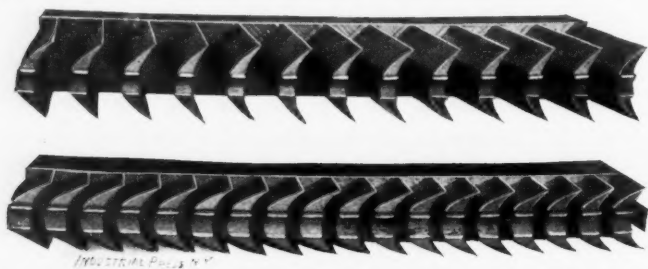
Bucket Segments: The lower one for High-pressure Steam and the upper one for the Steam after it has expanded to a lower pressure.
